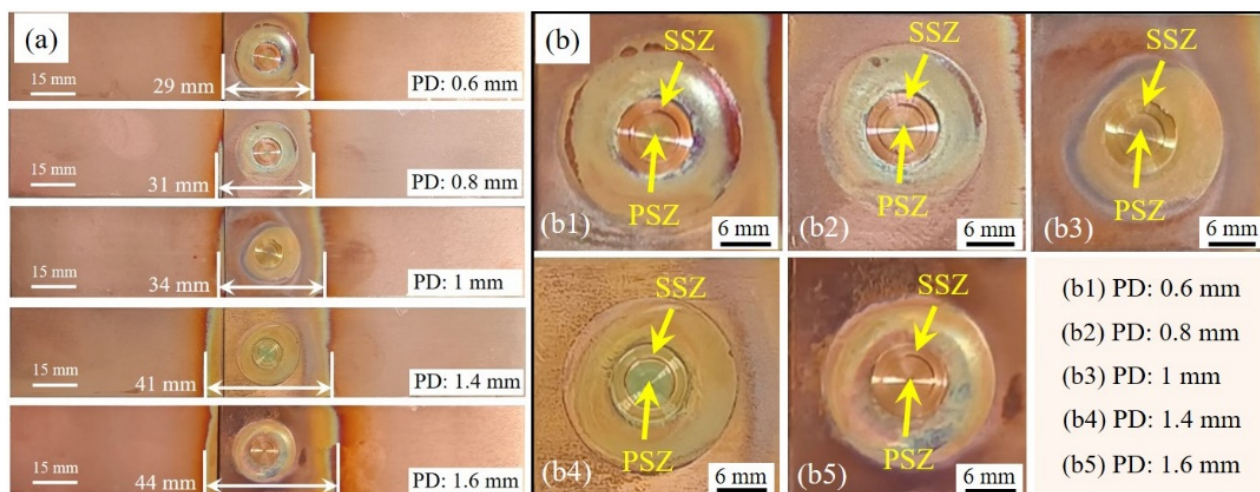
Appearance of WJs: (a) Images of welding workpieces; (b) Enlarged views of welding spots under different plunge depth
